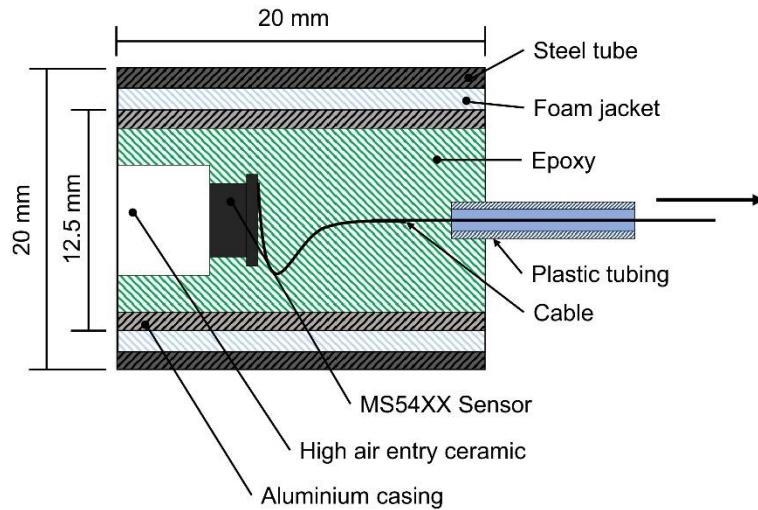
Cross-sectional schematic of modified shielded tensiometer
